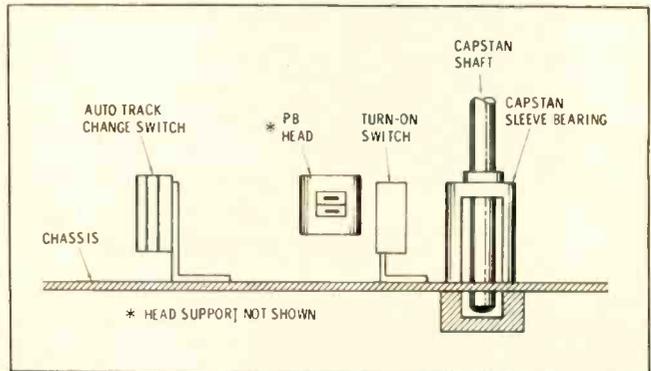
Front view of the tape transport system of a typical car eight-track player.
